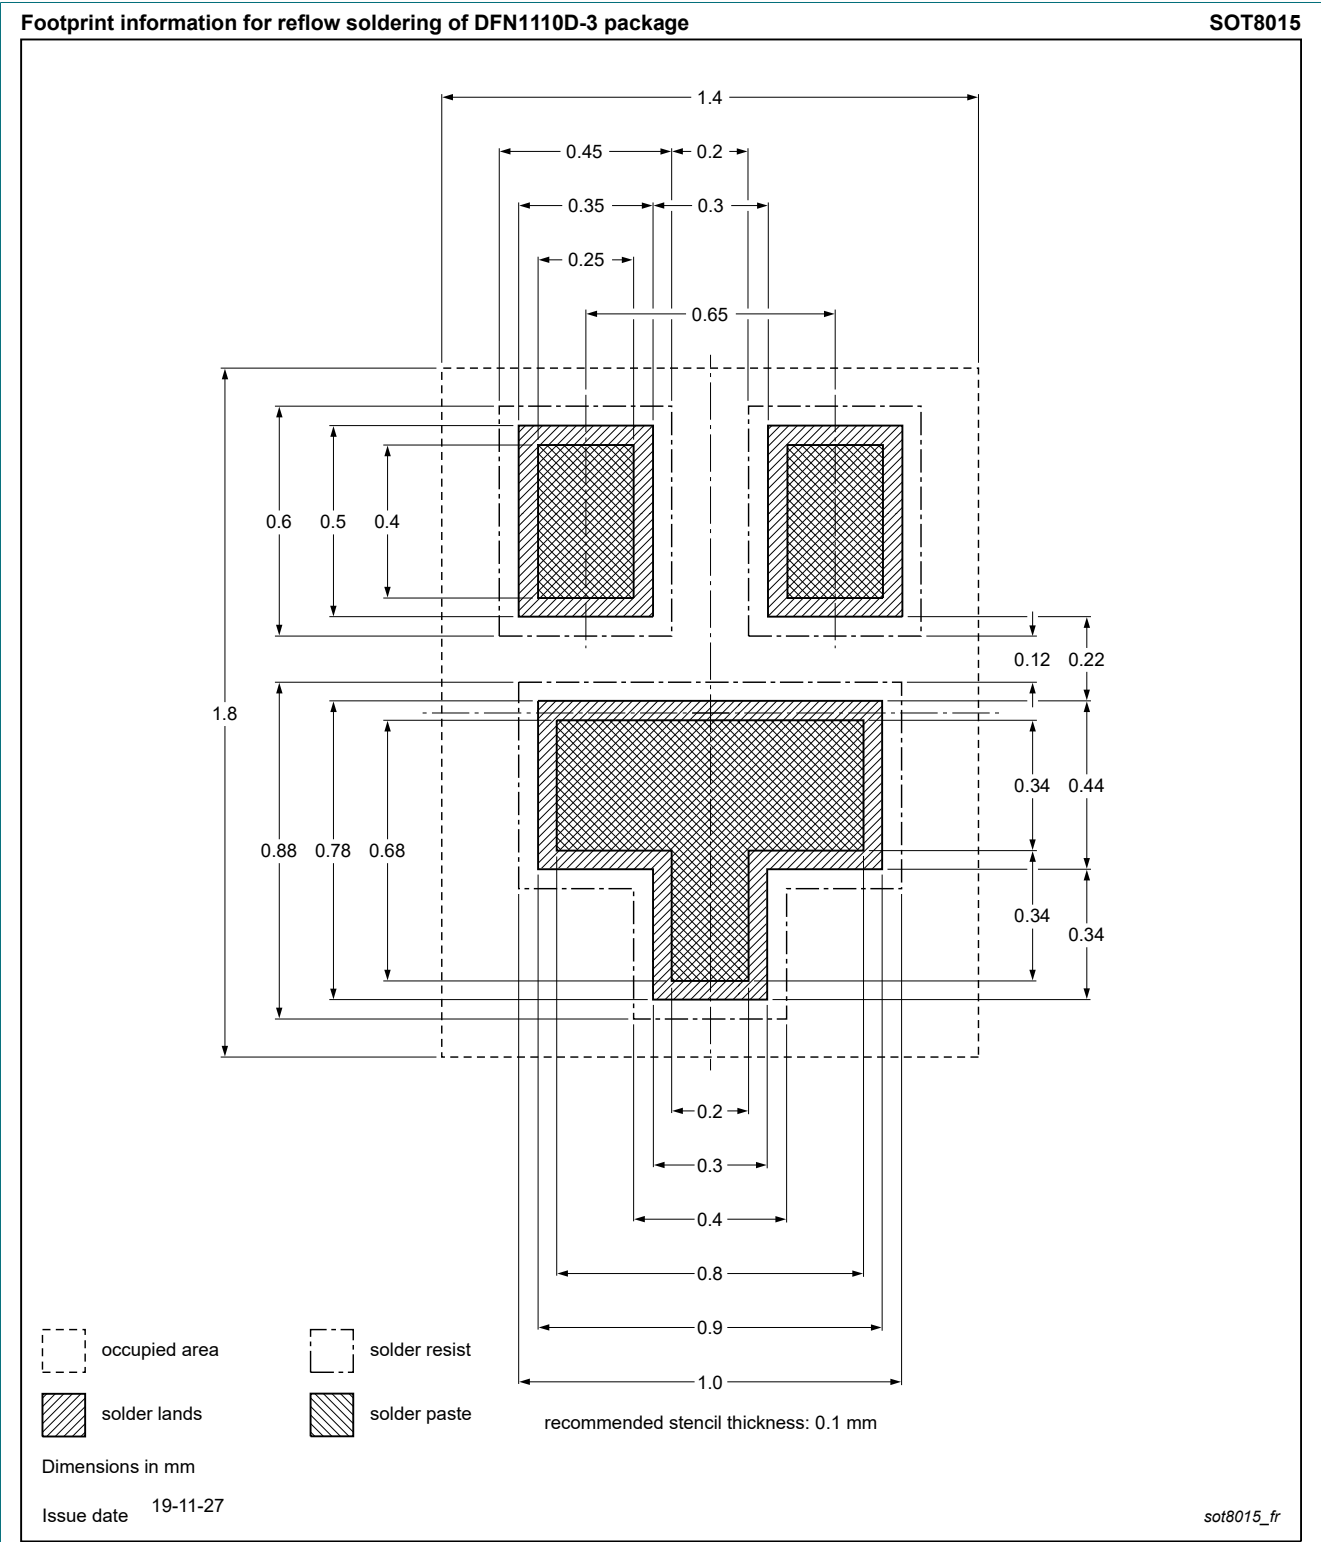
Reflow soldering footprint DFN1110D-3 (SOT8015)
